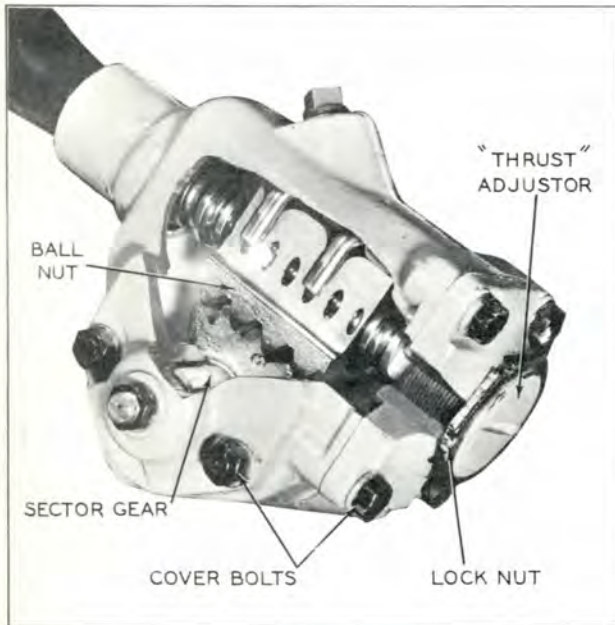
Steering Gear Thrust Adjustment (Worm Bearings)
